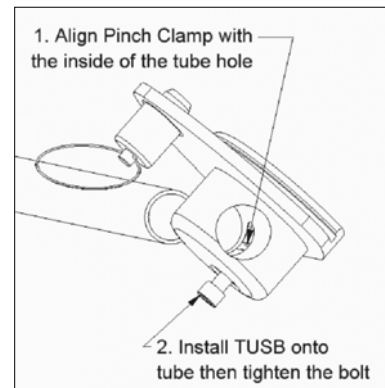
Remove the Cable Anchor at the end of the horizontal arm of the Right-Angle Tube and slide on the TUSB.
